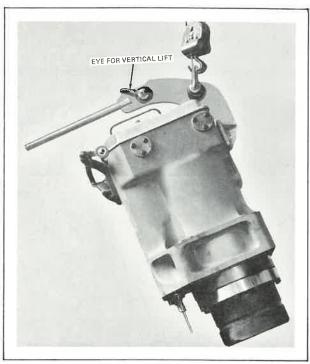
CYLINDER LIFTING TOOL APPLIED FOR ANGULAR LIFT.
